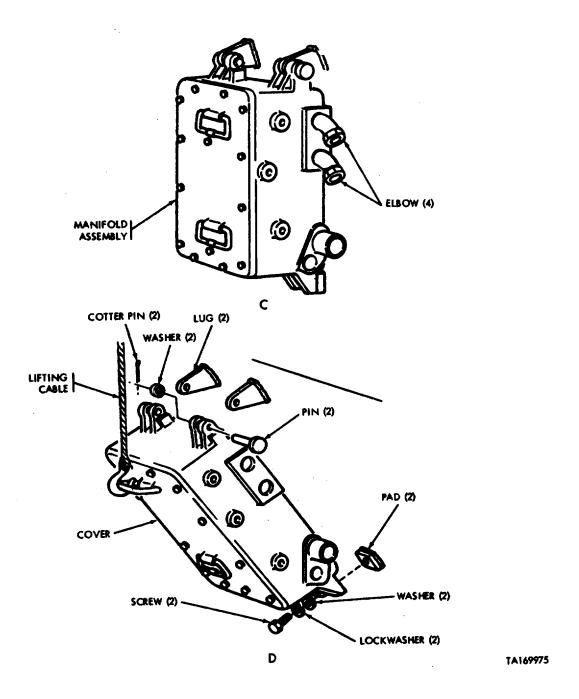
Removal or installation of manifold assembly (sheet 2 of 2).
